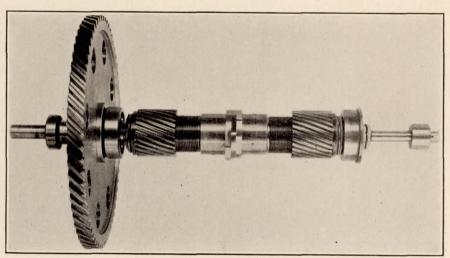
Cam-shaft assembly—cam parts displaced their maximum amounts from aligned position
